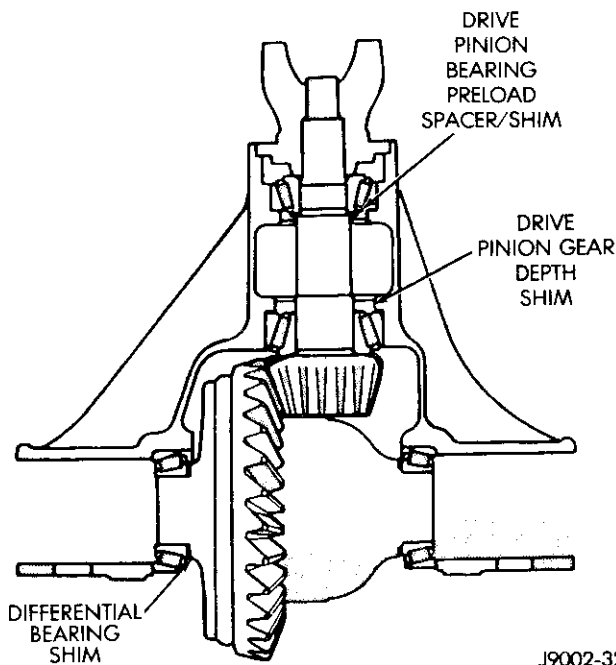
Depth Shim & Preload Torque Spacer/Shim Locations
